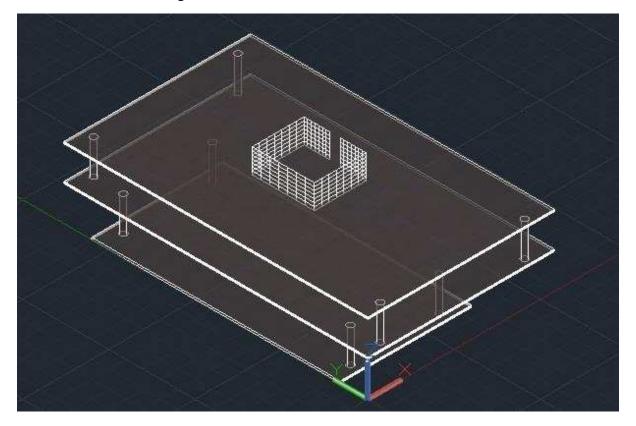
3D Design of the Platform to be Fixed on DaNI Robot
